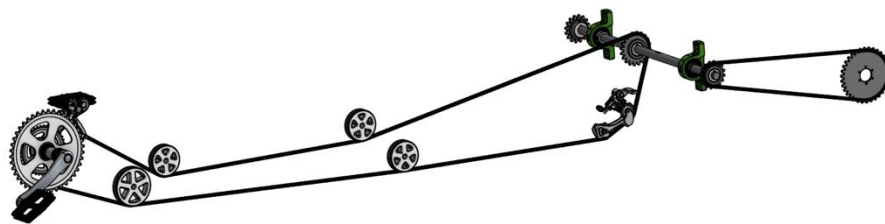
Digital prototype of drivetrain (Source: Author).
